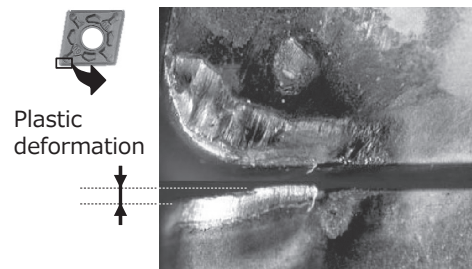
Tool damage in heat-resistant alloy machining
